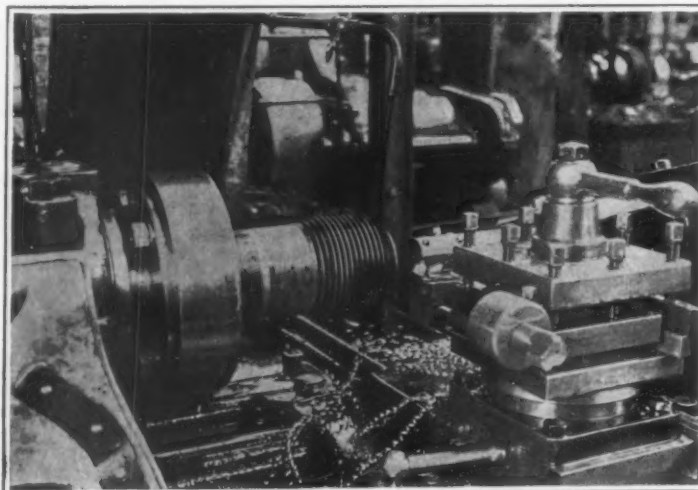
The process of finishing the cylinder head requires frequent regrindings.
